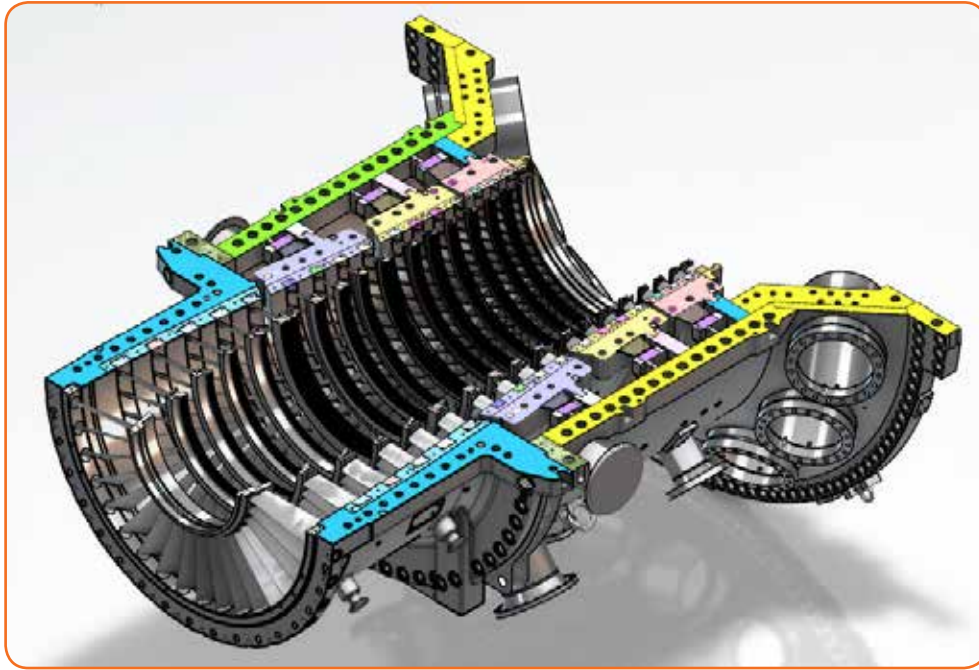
Mechanical Arrangement of the MGT-75 Compressor Section
